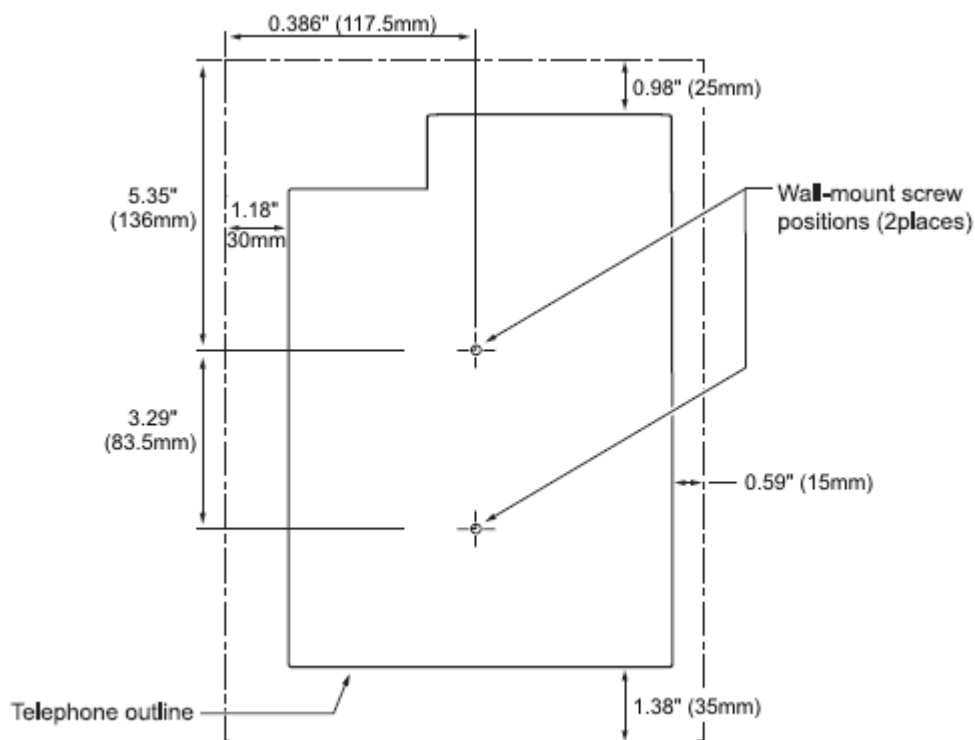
Wall Mount Spacing Guide BCH-L (BK) UNIT
